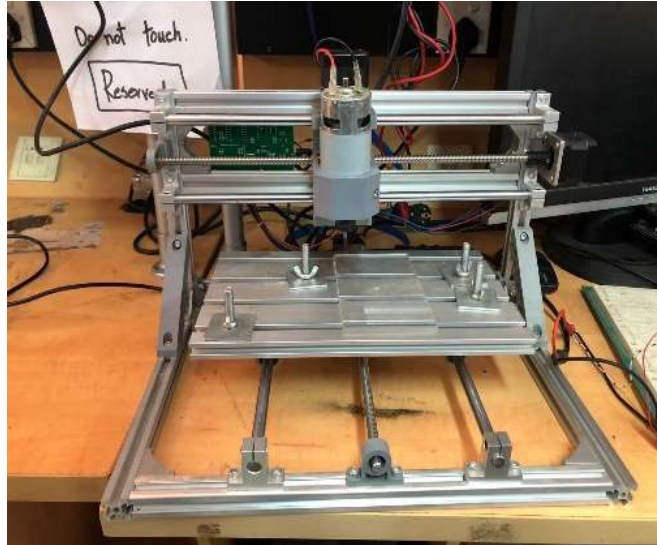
The CNC machine with bed size 15cm x 15cm x 10cm used for initial prototype design.
